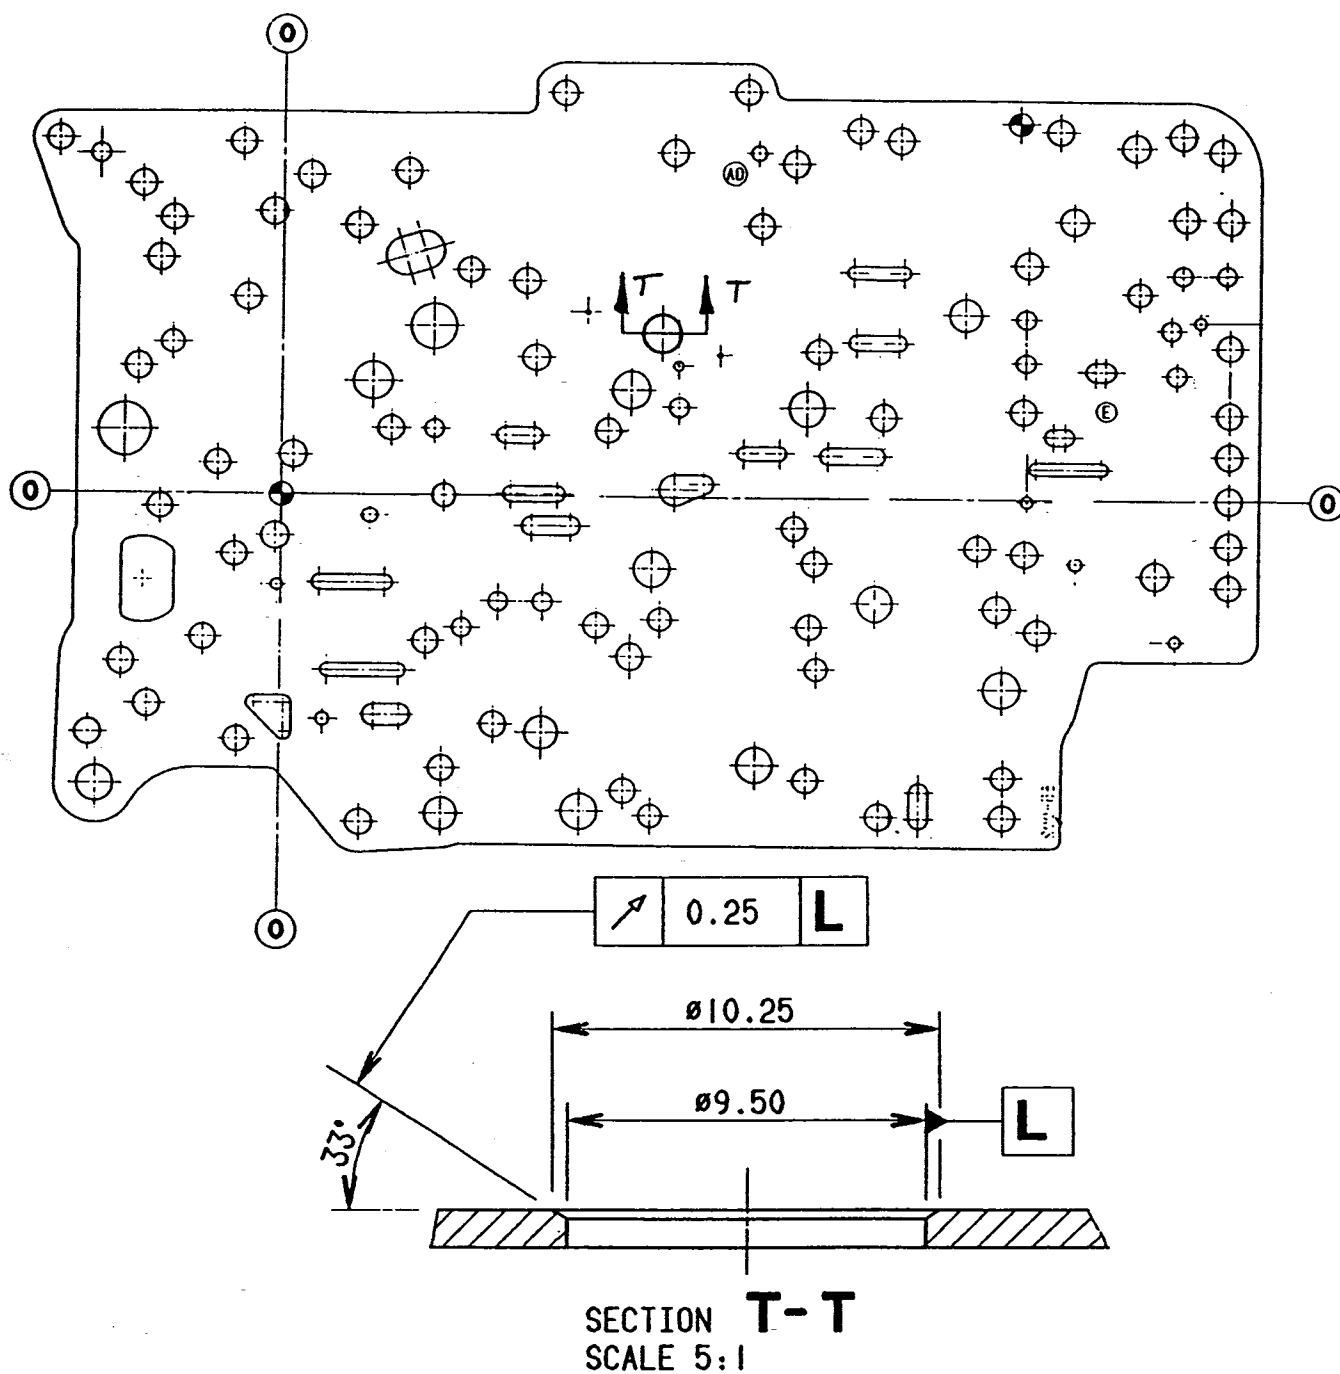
CAF HOLE AND 33° CHAMFER.
